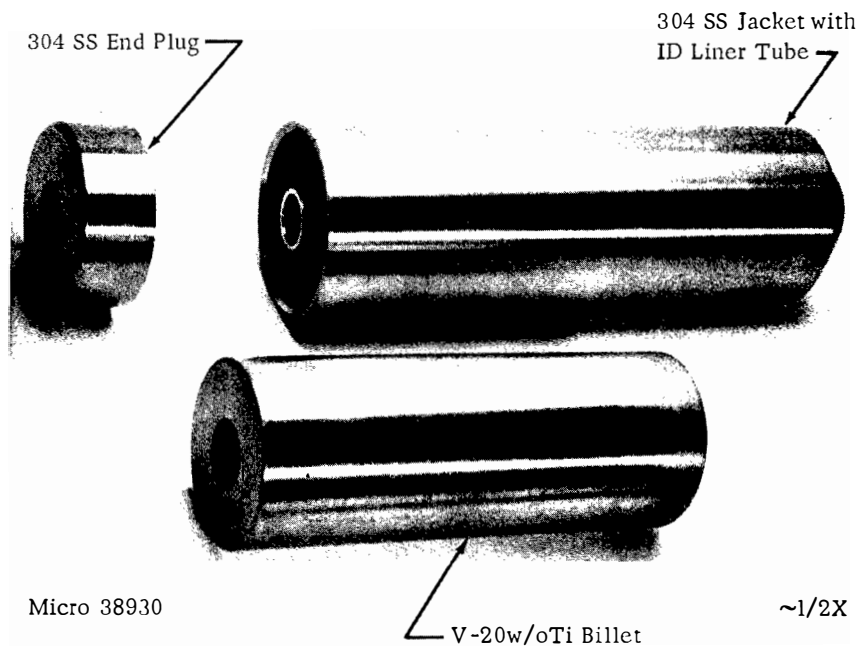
Photograph of Billet Components for Extrusion of V-20w/oTi Tube-blanks
